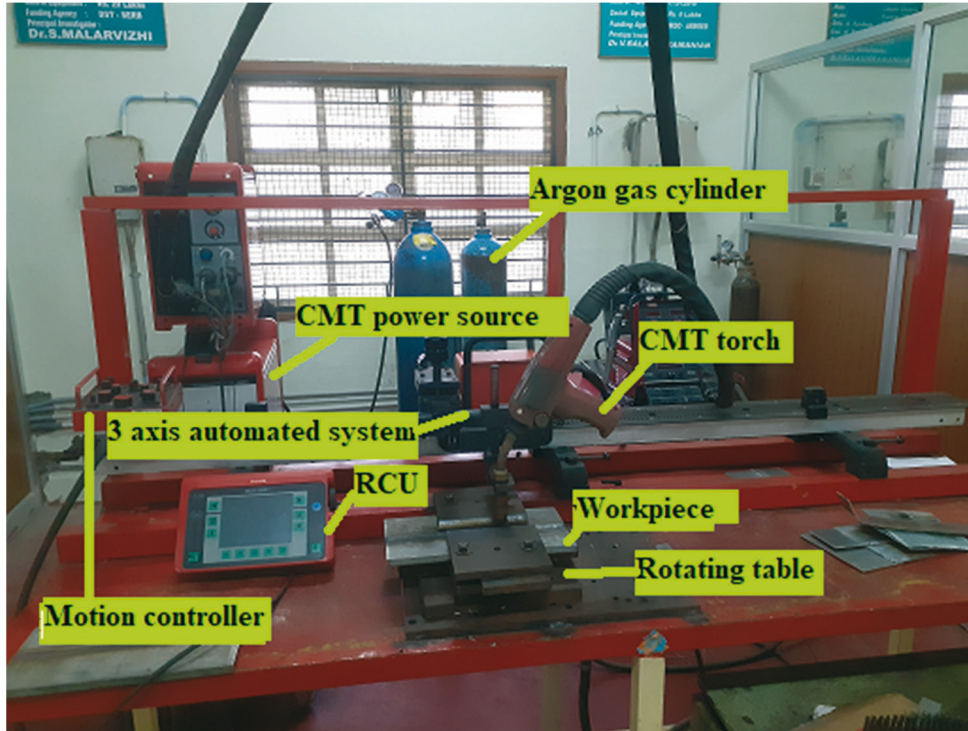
A Photograph of a cold metal transfer (CMT) welding machine
